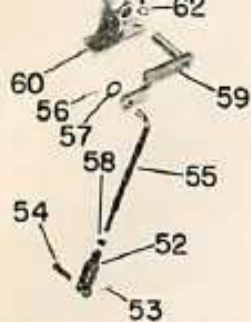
Exploded view of single speed pto clutch lever assembly and linkage. Yoke (52) should be adjusted on rod (55) so that latch (64) locks control lever firmly in disengaged position.
